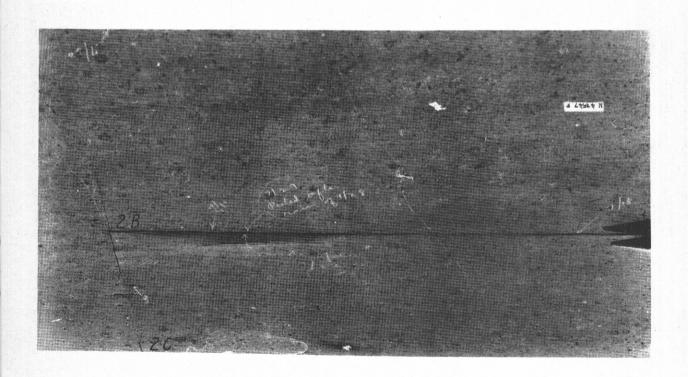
Sections 2B and 2C after 3 months' exposure. Section 2C pulled away from 2B after 2 days' exposure. This section was bag molded, using Butacite 4644 thermoplastic glue.
